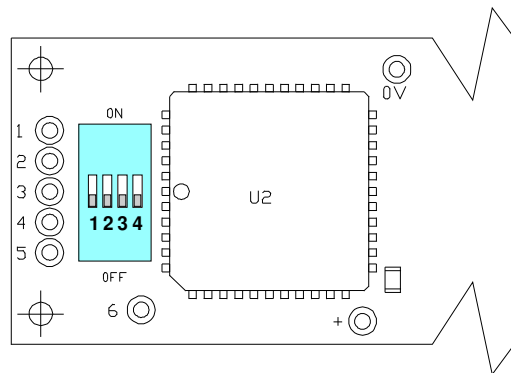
Tool Address Switch Positions – Board 116-00109
